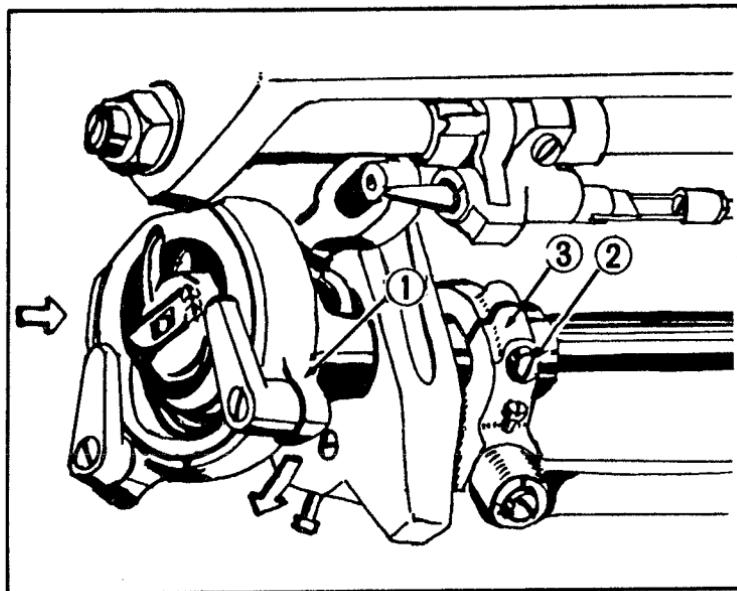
Incorrect clearance between the shuttle and side of the needle can also cause missed stitches. To adjust this clearance on White side load machines with oscillating shuttles, read the text carefully.
